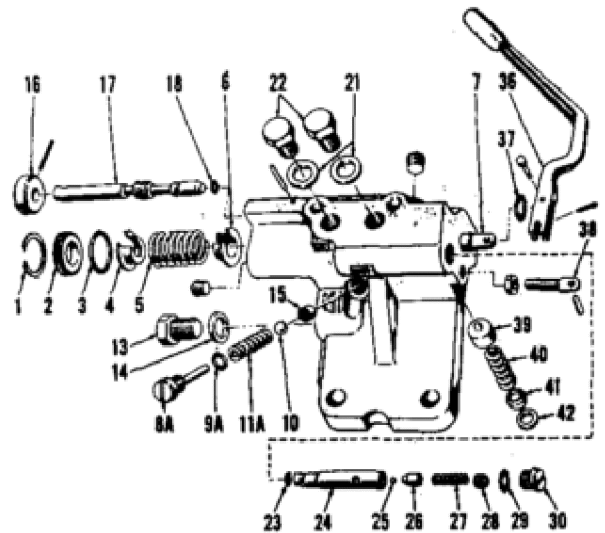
Exploded view of single spool remote control valve with spool detent (39) mechanism. Valve spool (7) is not shown removed from valve body; refer to Fig. 429. Refer to Fig. 430 for late production detent regulating valve assembly.
